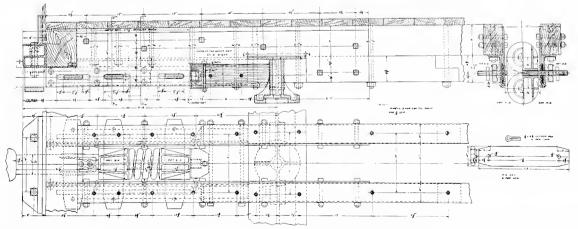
Miner Friction Draft Gear, Applied to D., L. & W. Cars with Steel Center Sills. W. H. Miner Co.
